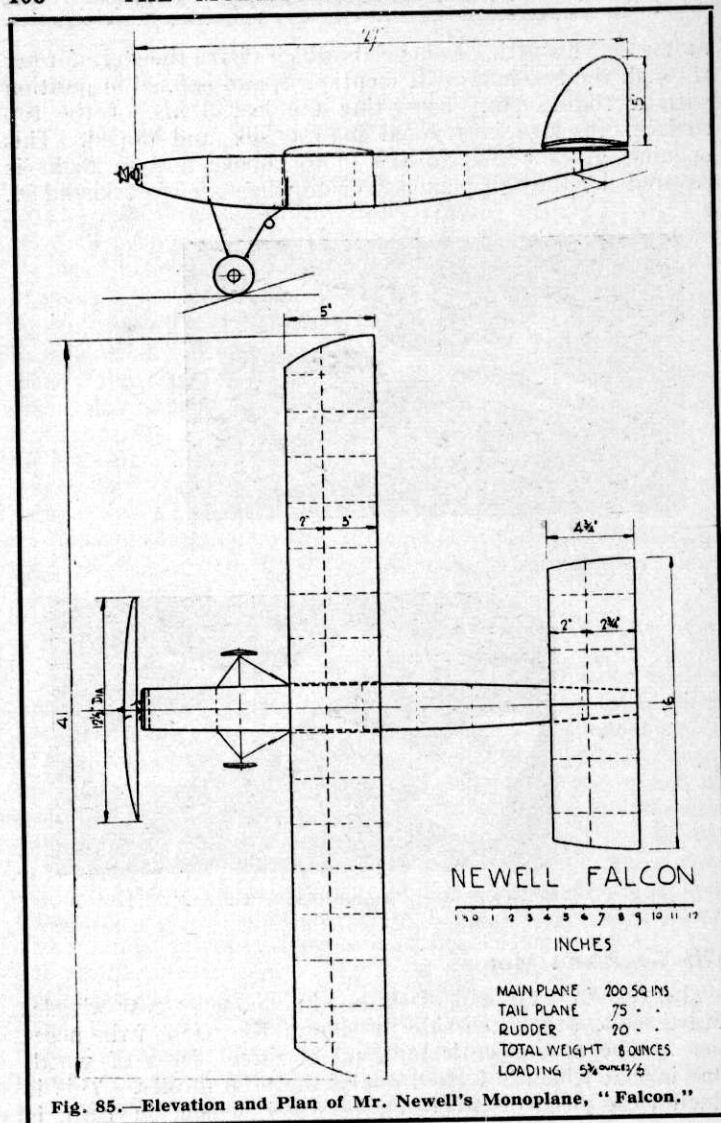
Elevation and Plan of Mr. Newell's Monoplane, "Falcon."
